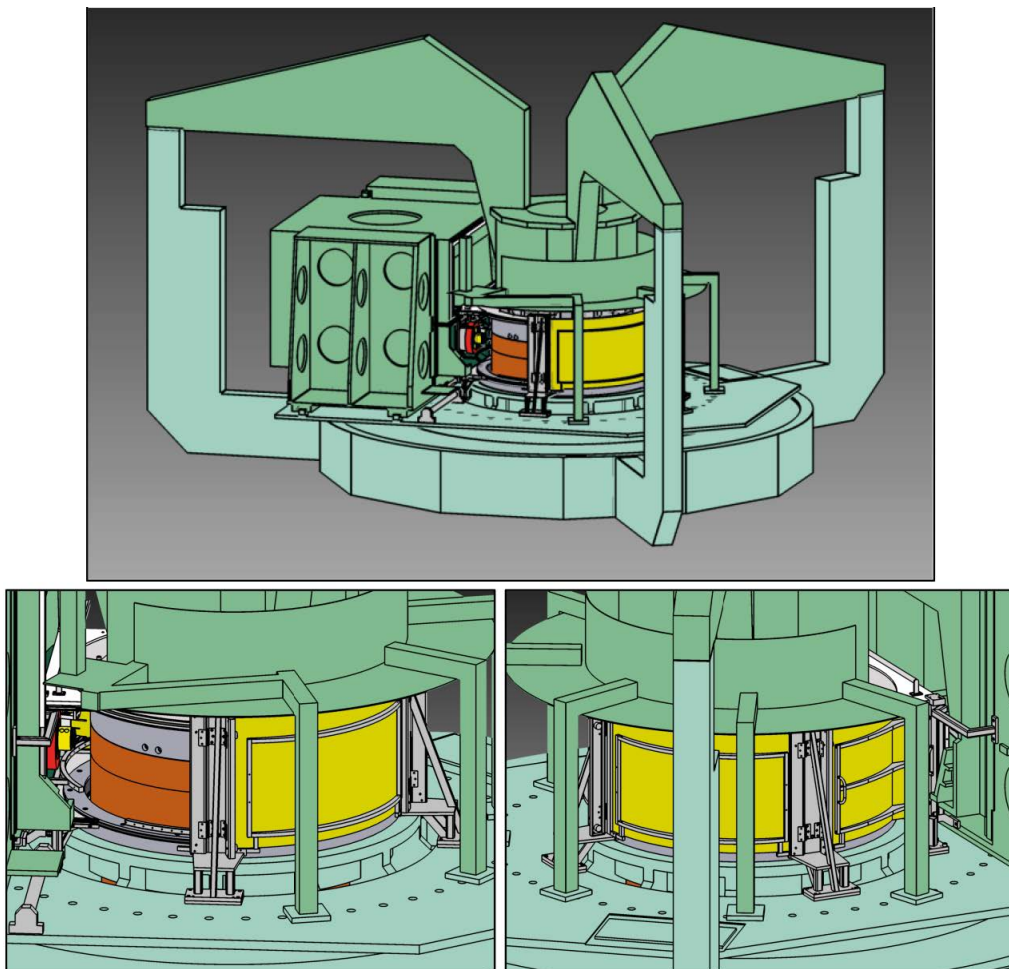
An overview of the welding machine with PMMA shields surrounding the weld in yellow. One shield is removed in the drawings to show the welding head and the tool. The lower sketches show a detailed view of the layout of the gas shield. The lower right picture shows the backside relative to the other two pictures.
